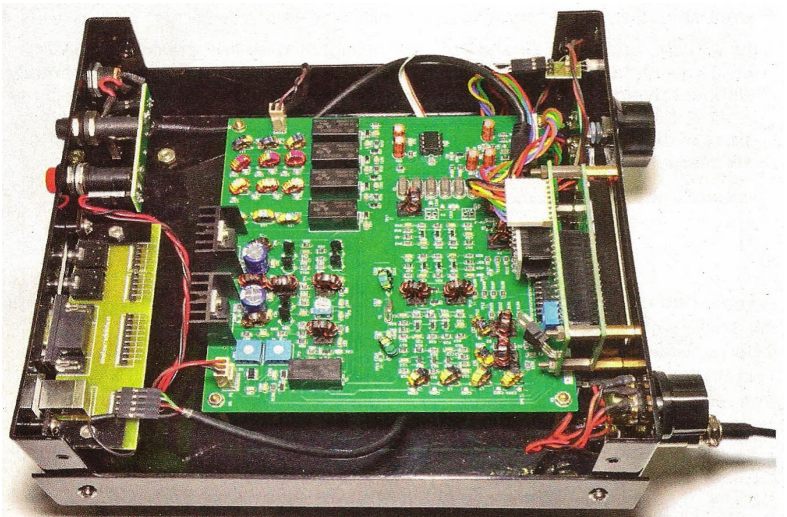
The completed μ BITX assembly mounted in the InKits enclosure.
